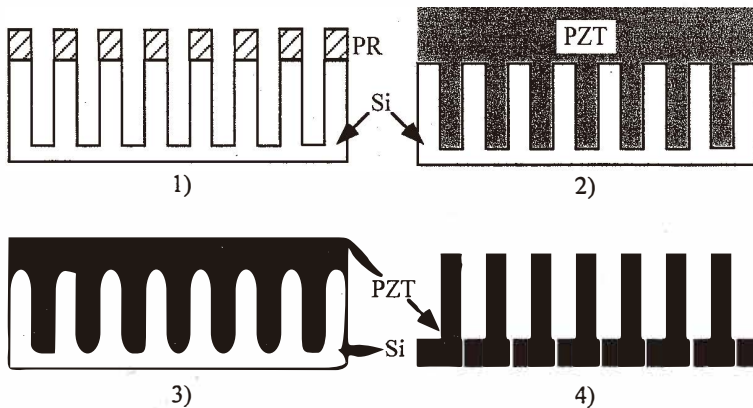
Lost Si mold process: 1) fabrication of a Si mold by deep RIE, 2) PZT slurry casting, solidification and calcination, 3) PZT sintering by HIP, 4) removal of the Si mold.
